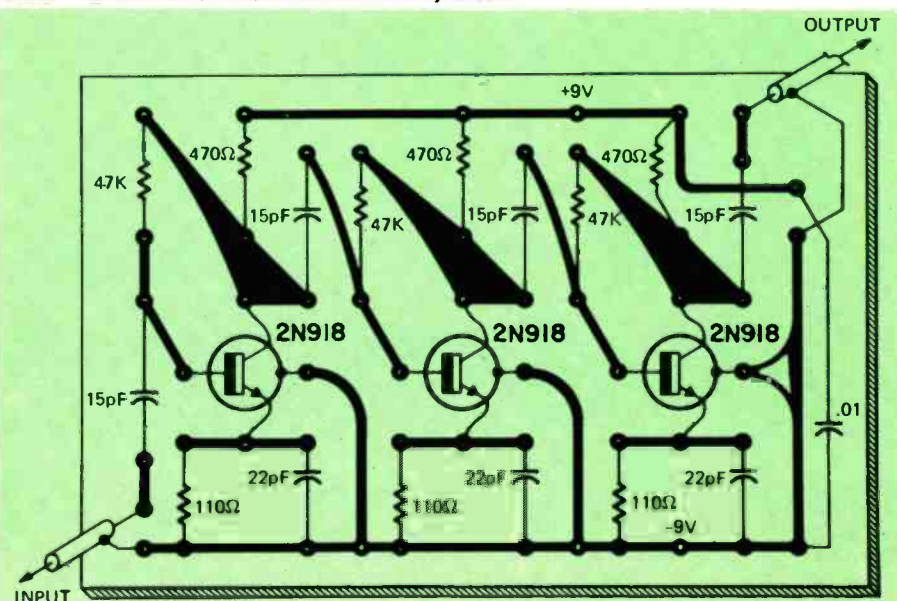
PARTS ARE ASSEMBLED ON A BOARD approximately 2½ by 2½ inches. The circuit is easy to duplicate using perforated board and clips or etched and drilled PC board.
